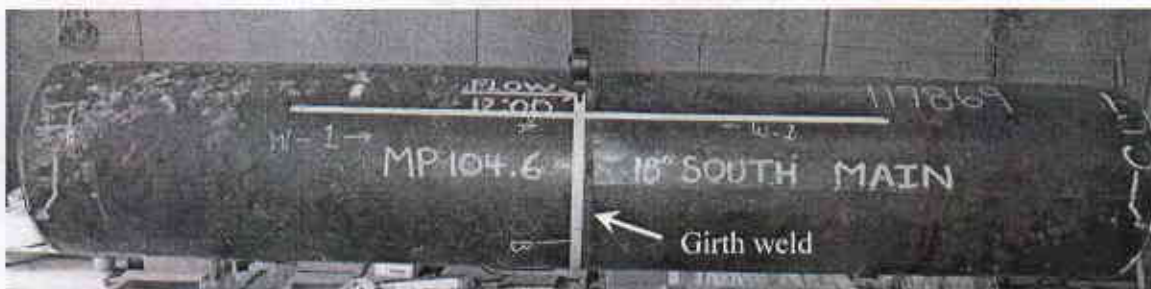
Photograph of pipe Sample 1 as received, containing the girth weld that leaked. Scale shown is in inches.
